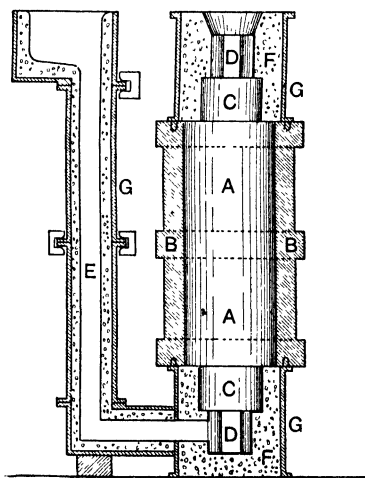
A, body of roll; B, chill; C, neck; D, wobbler end; E, running-gate; F, sand mould; G, boxes.
